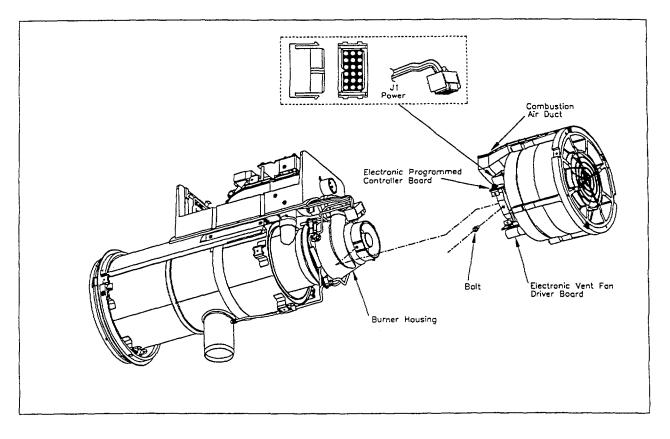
Bolt Removal Detail, Vent Fan Assembly
